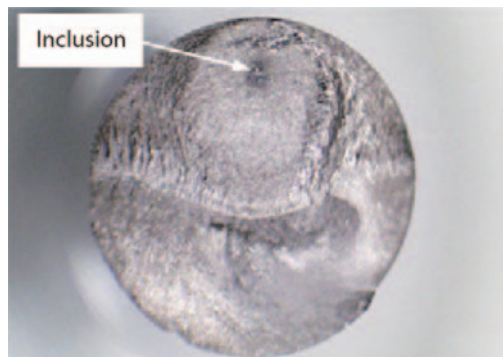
Photo of the Fractured Surface (Optical Microscope)
